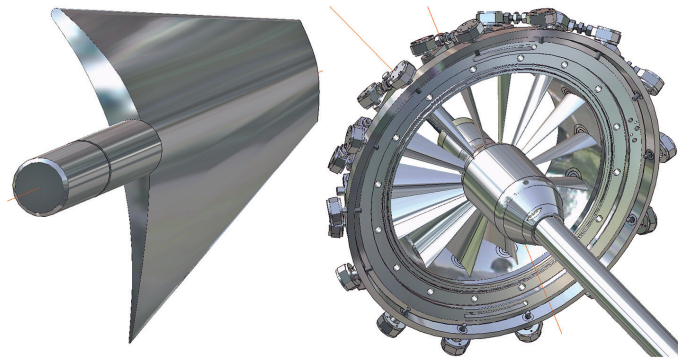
Views of the single guide vane blade and guide vane wheel of the low-head Kaplan hydraulic turbine model
